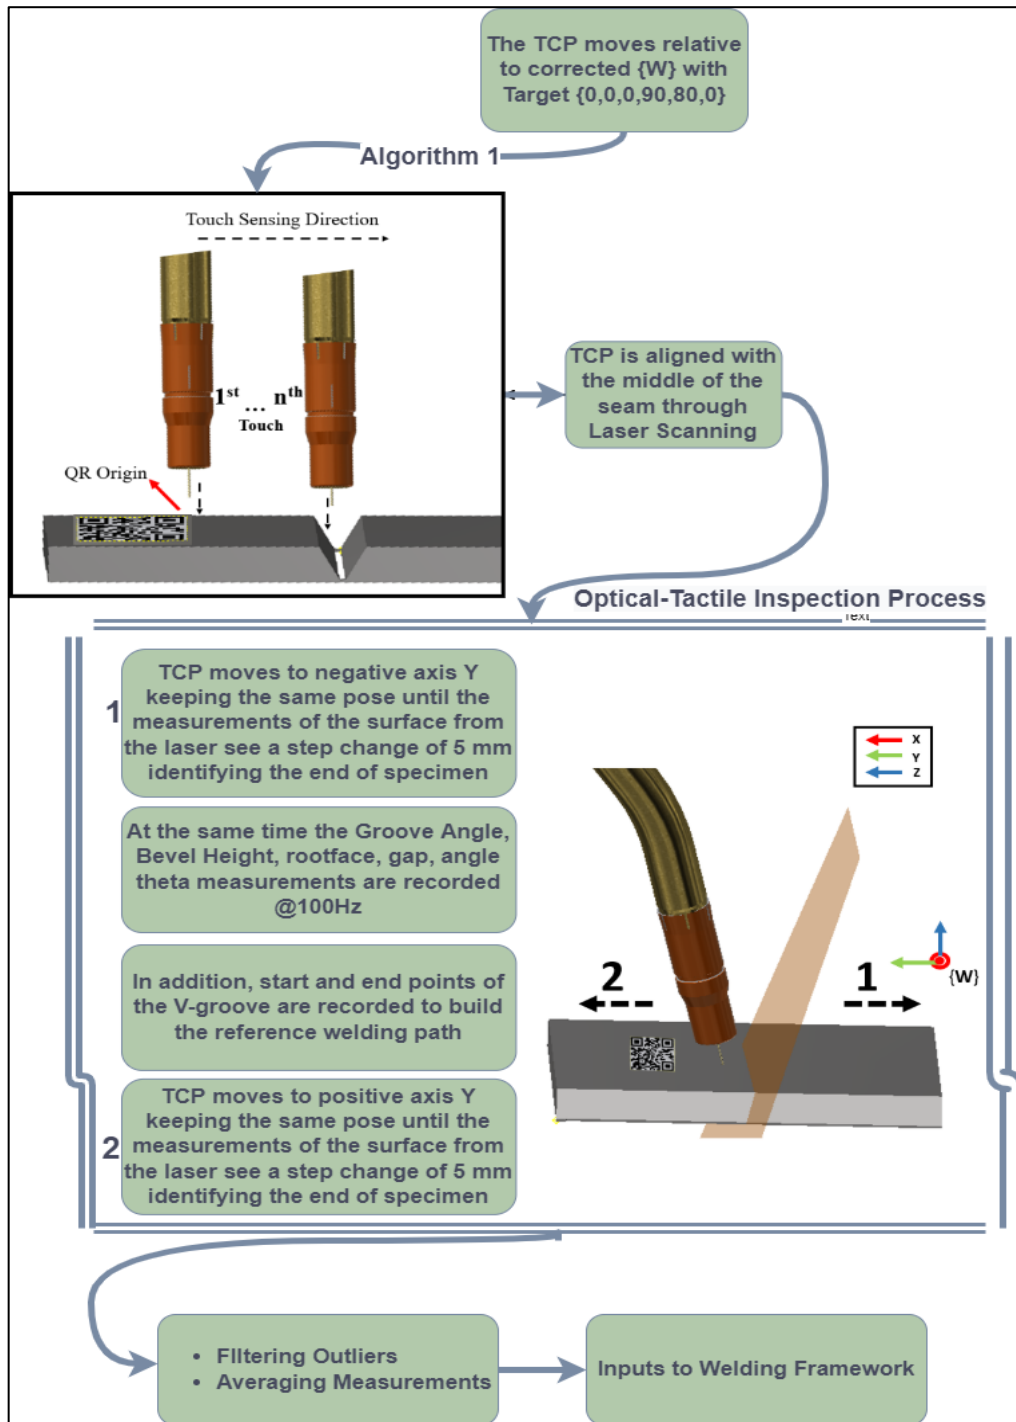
The V-groove dynamic inspection process for generating the root-pass path is used as a reference welding path and measurement of geometric characteristics which are used as inputs for the multi-pass welding system
